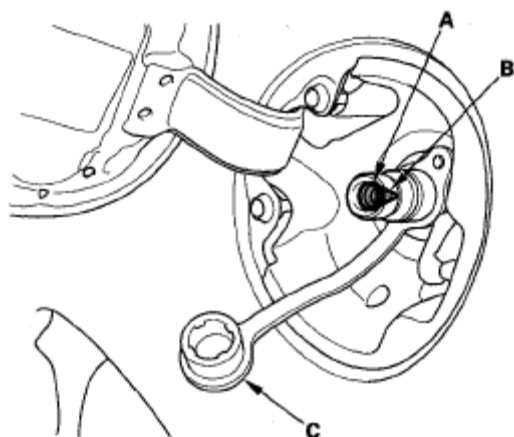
Identifying Nozzle O-Ring, Filter And Dust Cap
